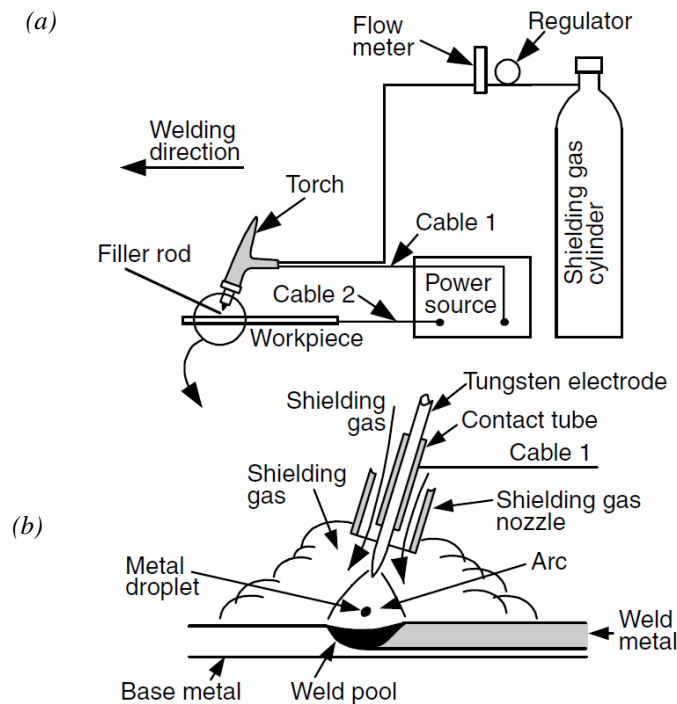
Gas tungsten arc welding: (a) overall process; (b) welding area. Adapted from [34].
